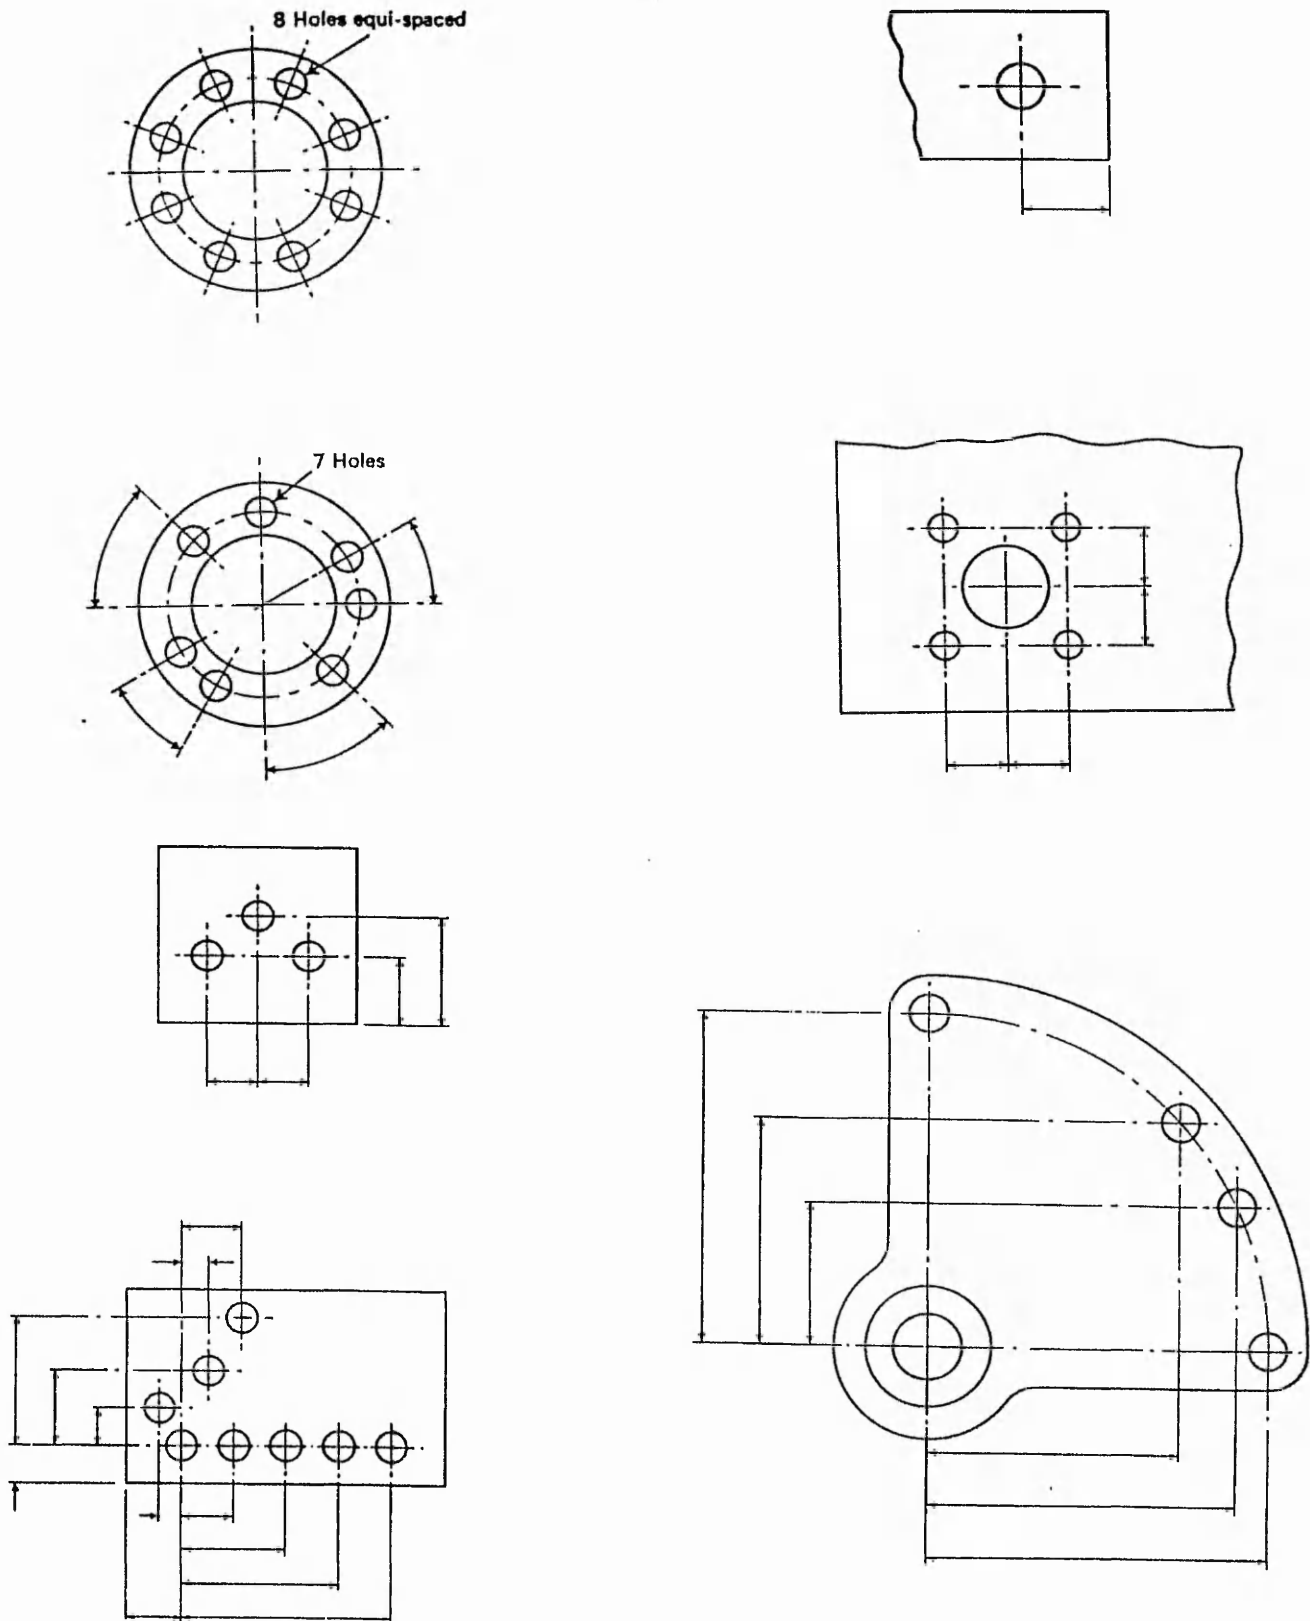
Example of using dimensions and conventions to locate holes on Engineering Drawings (taken from [BSI]).
